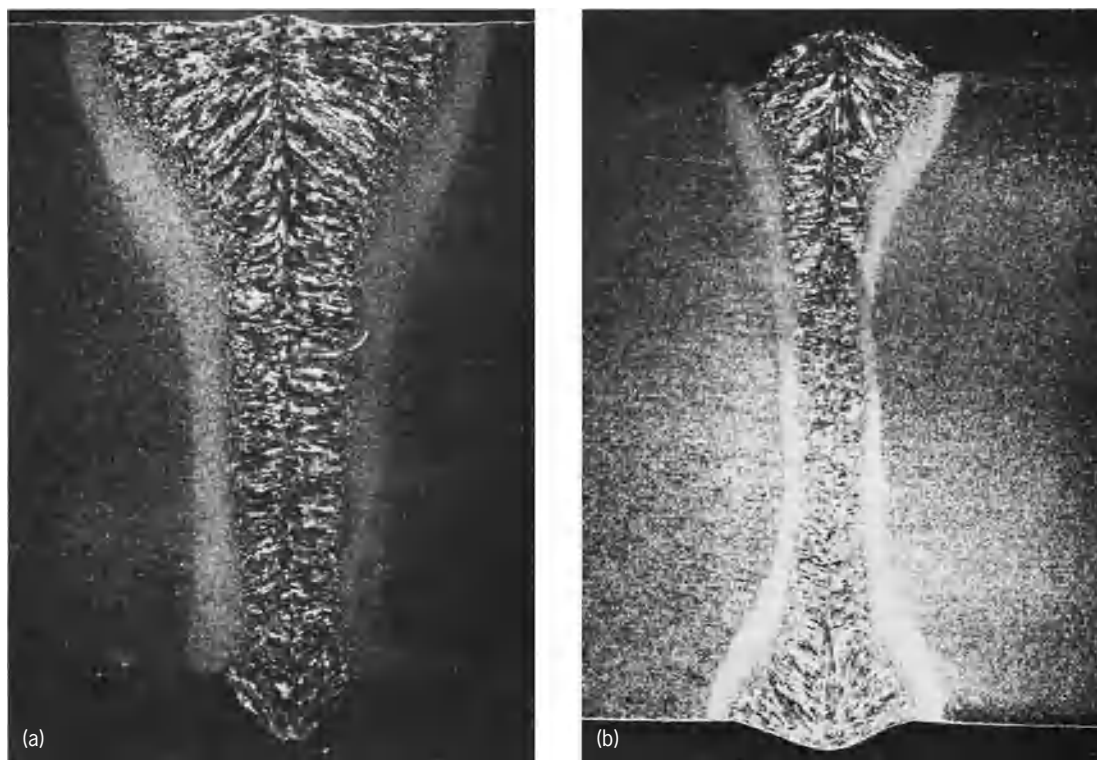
Cross sections (0.5-in.- or 1.3-cm-thick plate) of laser welds in X-80 arctic pipeline steel. (a) Single-pass weld. (b) Dual-pass weld. (From E. M. Breinan and C. M. Banas, *Weld. Res. Council Bull.* 201, pp. 47–57, December 1974)
